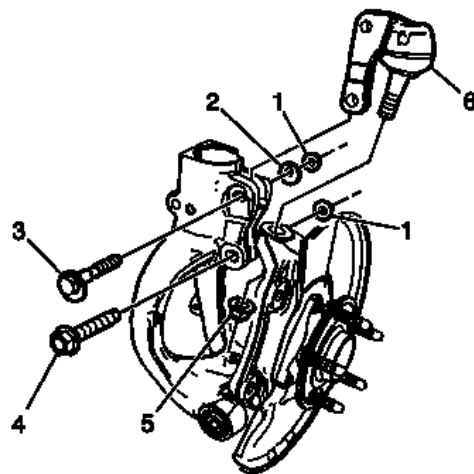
Steering Knuckle Upper Ball Stud (GNB)
